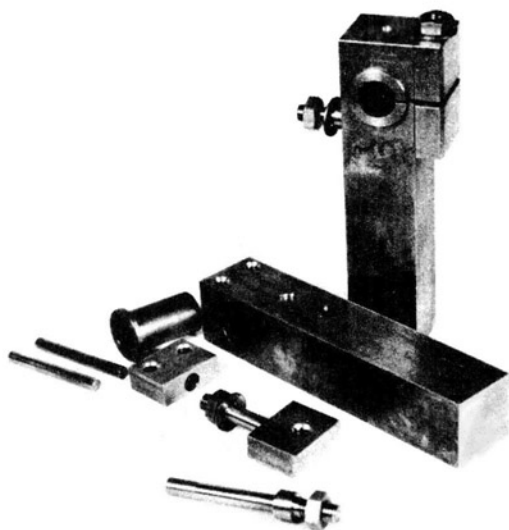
Assembly of the bearing adjustment components to the headstock columns.
